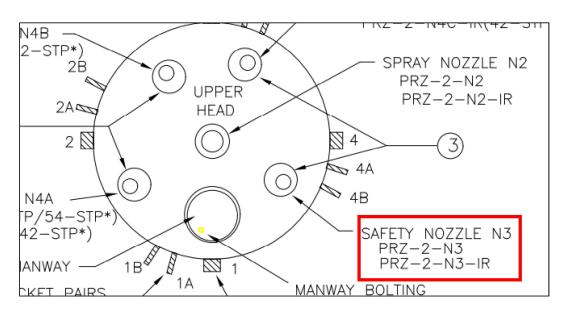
Weld PRZ-2-N3 (Extracted from Reference DWG A-PRZ-1)
